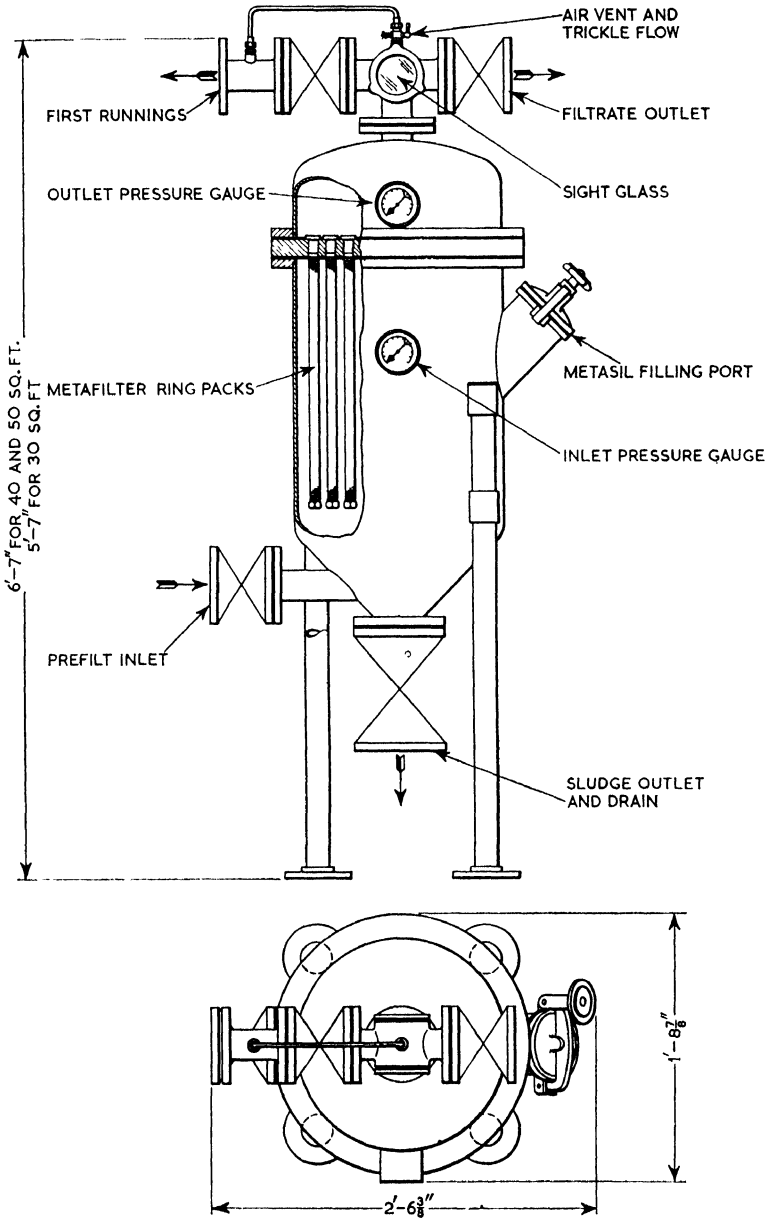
SECTIONAL VIEW OF THE METAFILTER.
